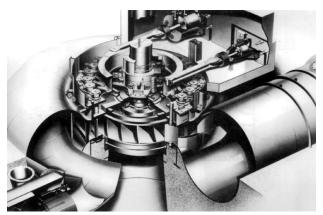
Cross-sectional view of a horizontal Francis turbine.
